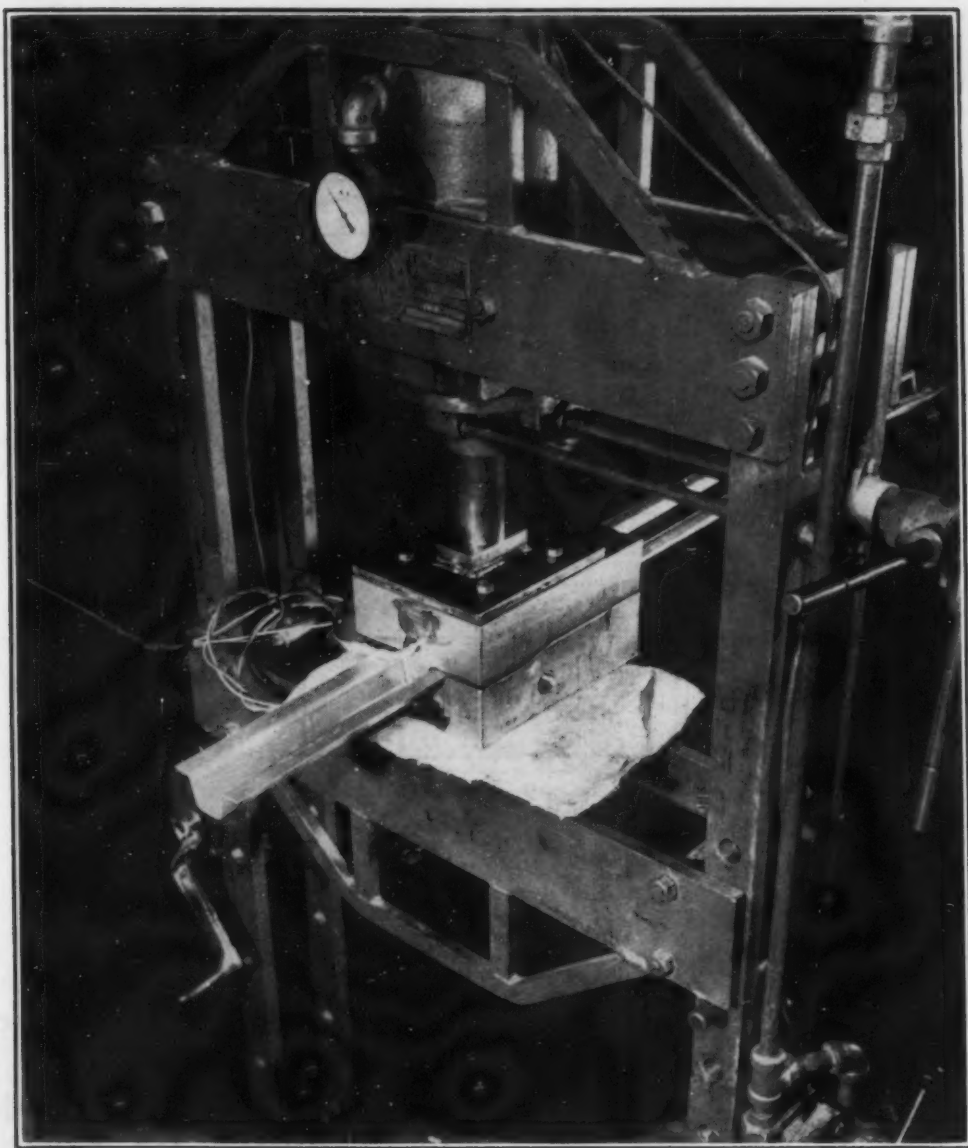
Experimental Hot Forming 75S-T6 Alclad Hat Section Using Heated Dies. Section preheated by method shown in Fig. 4.
